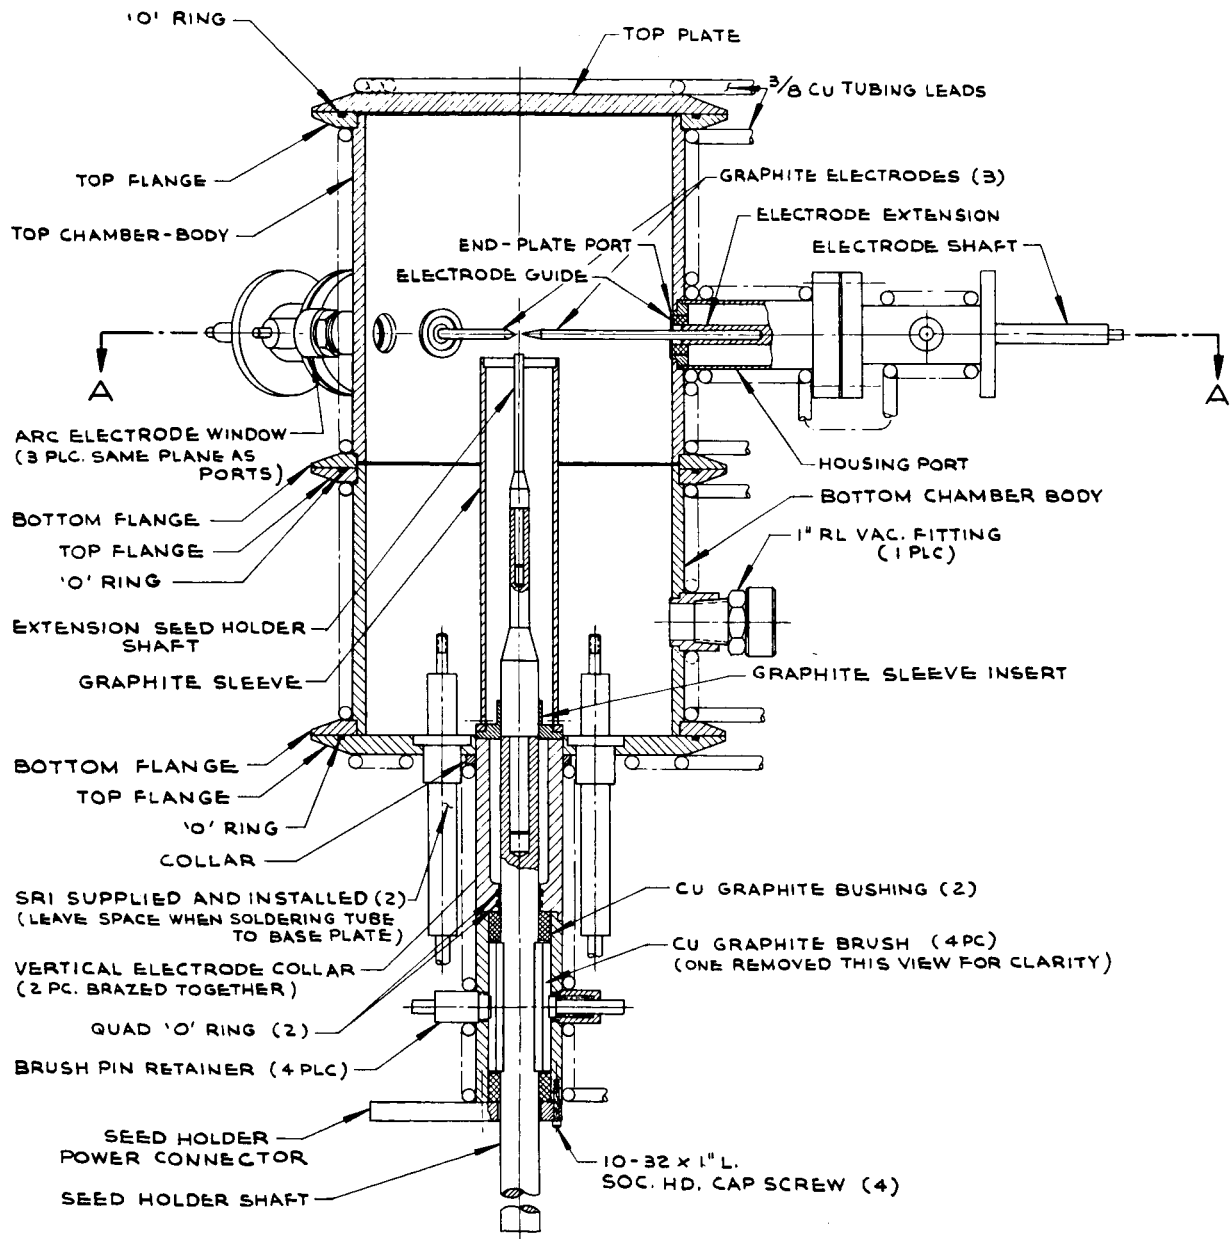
FRONT VIEW OF ARC-VERNEUIL FURNACE MOD 2 ASSEMBLY
